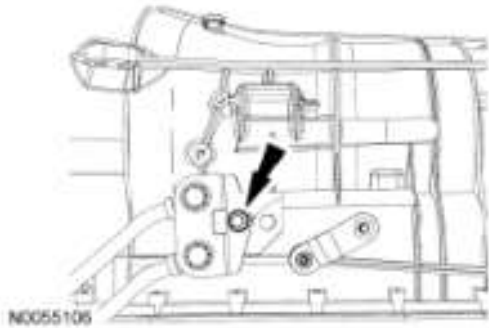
Identifying Flexplate-To-Torque Converter Nuts
